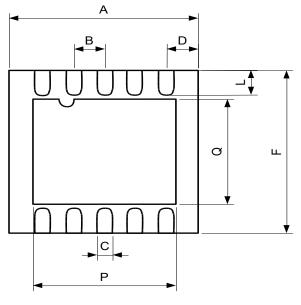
DFN(3x3)-10 Package dimensions (bottom view). Note that the saddle needs to be connected to common GND on the PCB.
